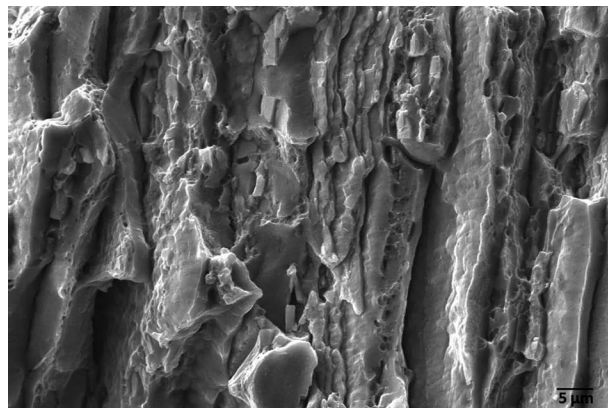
High magnified image of the fracture surface shown in Fig. 151
